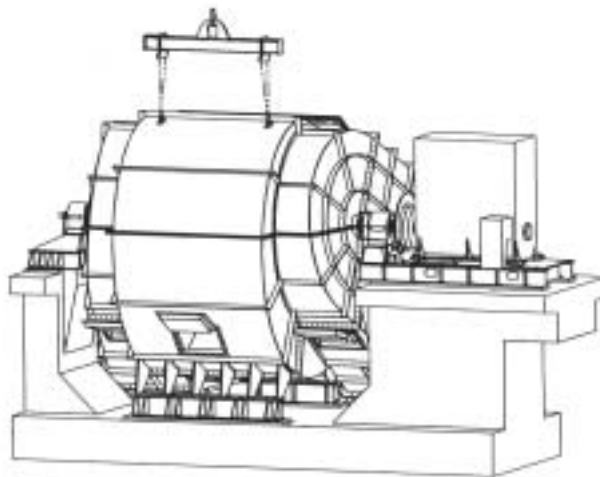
Rotor insertion in the fan housing and bearing housing lower part
